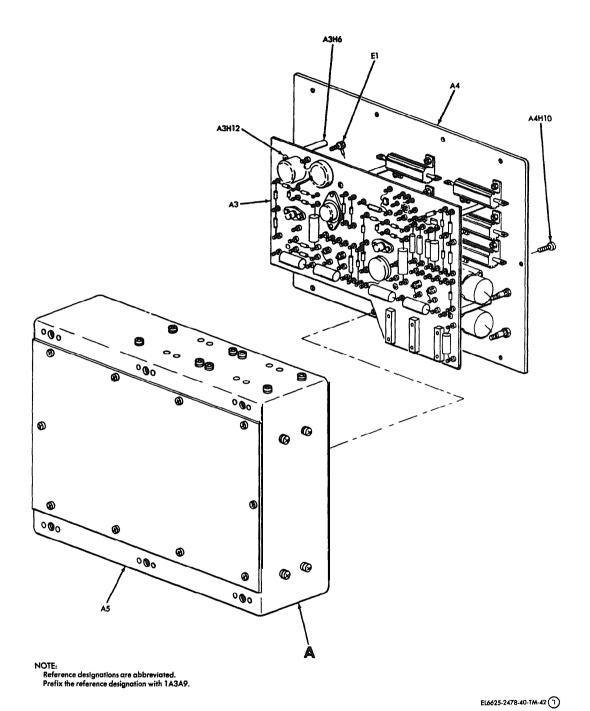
(1). Power supply assembly 1A3A9, location of parts (sheet 1 of 3).
